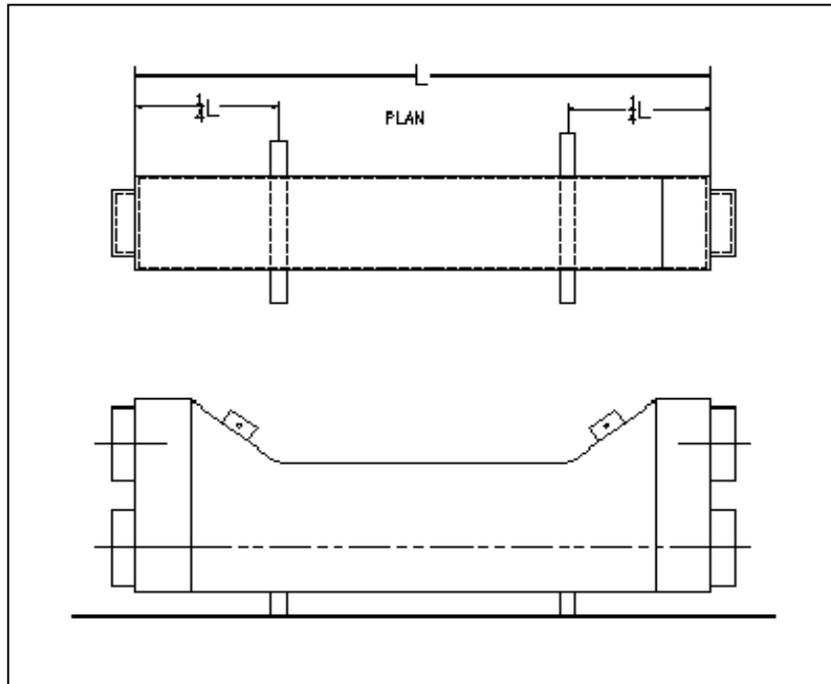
Mounting and Hanging Positions (Top: Bird's Eye | Bottom: Side View)
